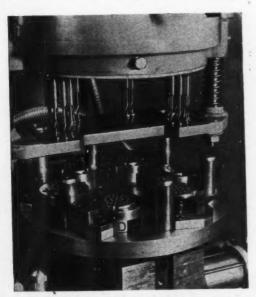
Close-up view of the indexing fixture and the drilling head on the machine shown in Fig. 5
